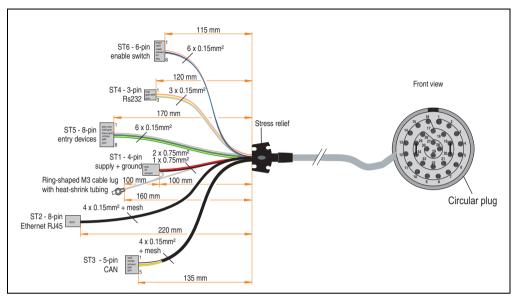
Cable specifications - attachment cable 5CAMPH.0xxx-10
